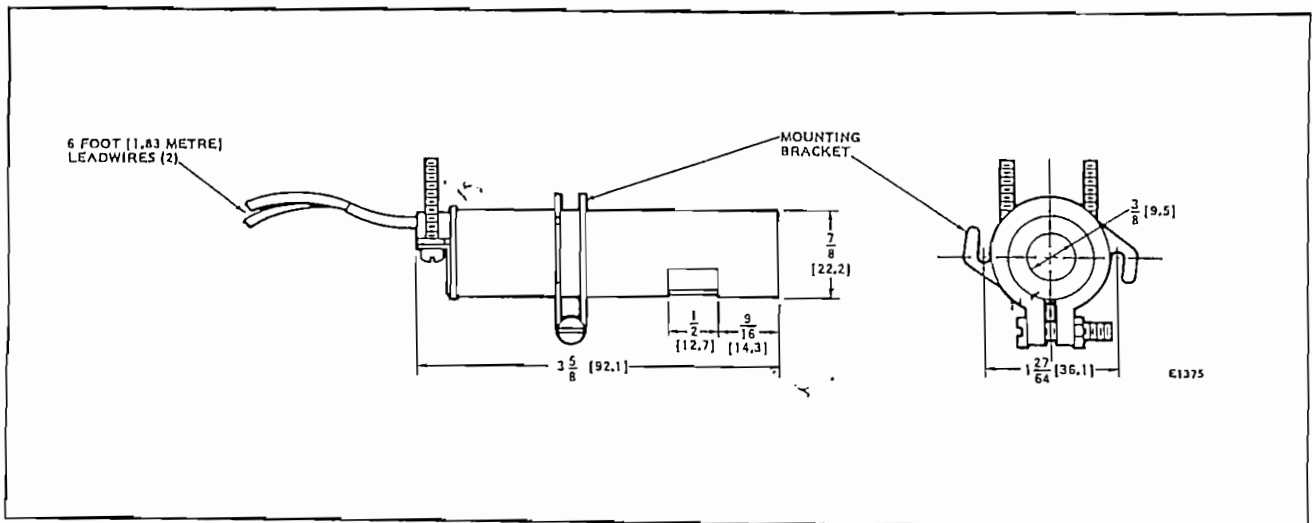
INSTALLATION DIMENSIONS OF THE C7044A, IN in. [mm IN BRACKETS].
